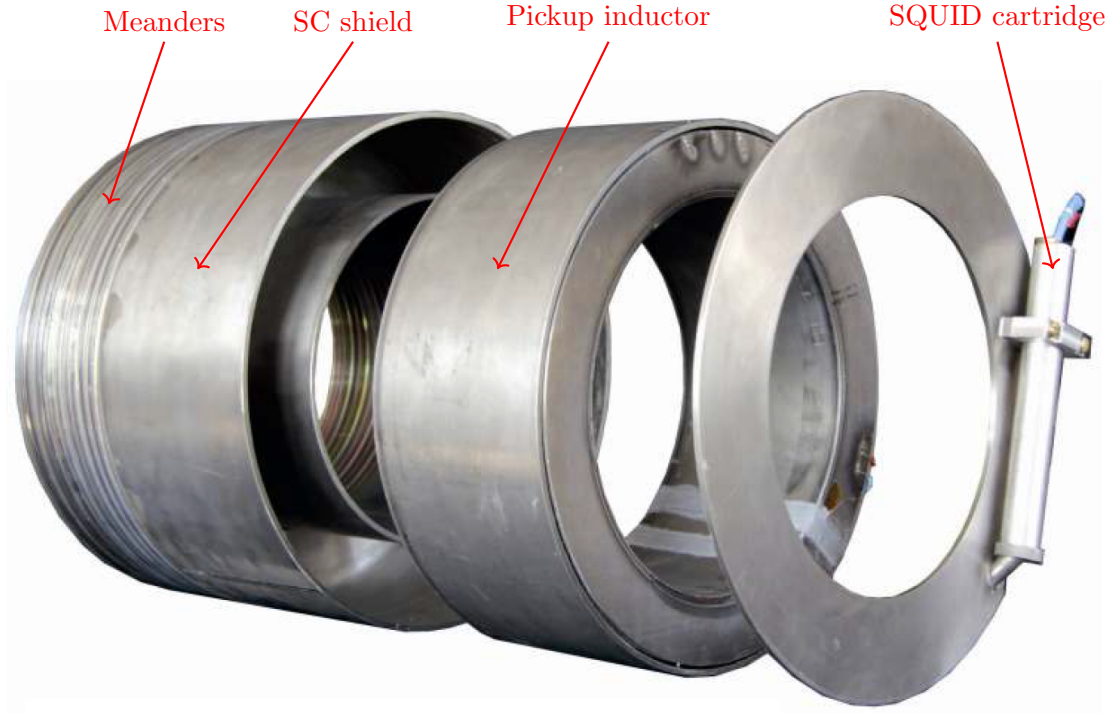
Exploded view of the CCC assembly, with the meander shield, the pickup inductor with the ferromagnetic core and the end cap with the cartridge.
